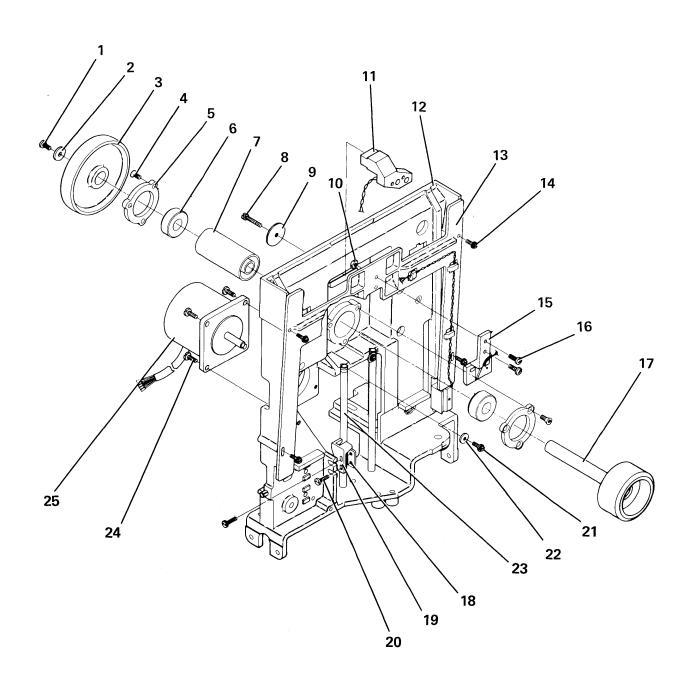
BASE PLATE ASSEMBLY. SEE LIST 16.
